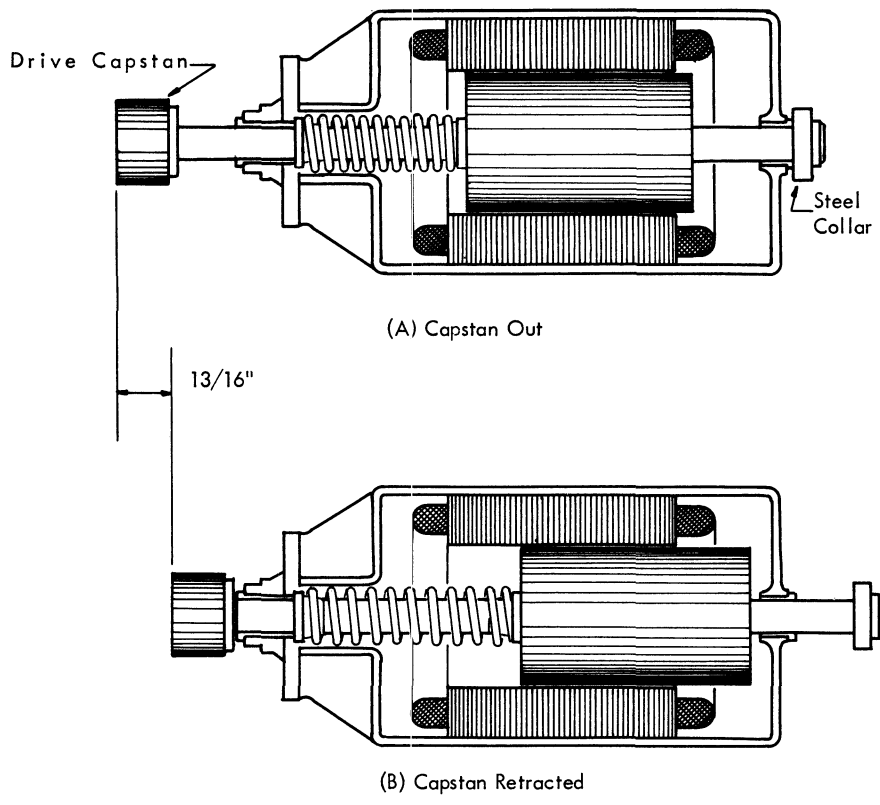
CAPSTAN DRIVE MOTOR, 727 MODEL III
